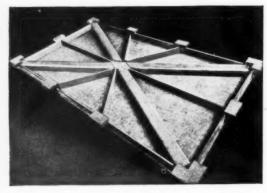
Stiffener arrangement on under side of shallow machine bed.
